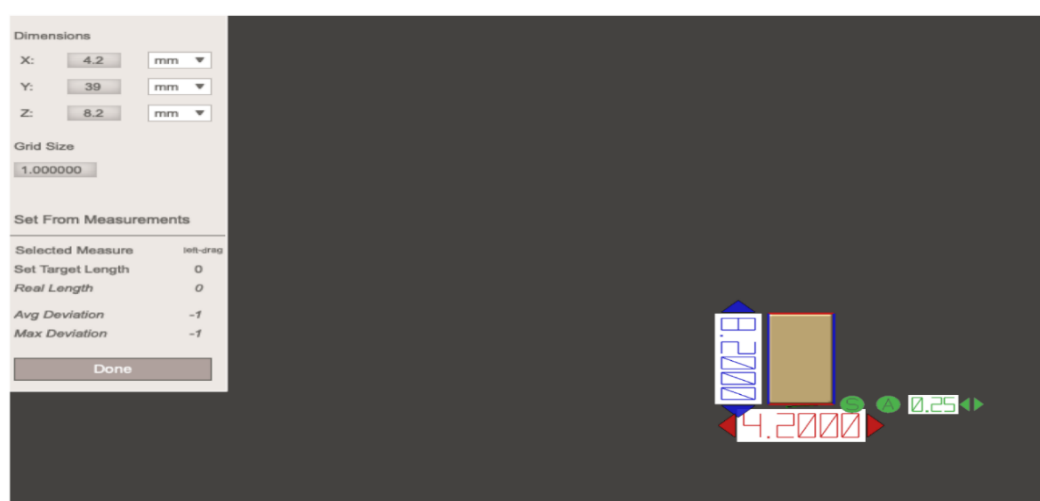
(b) CAD model and dimensions of the sample, showing a different view.
